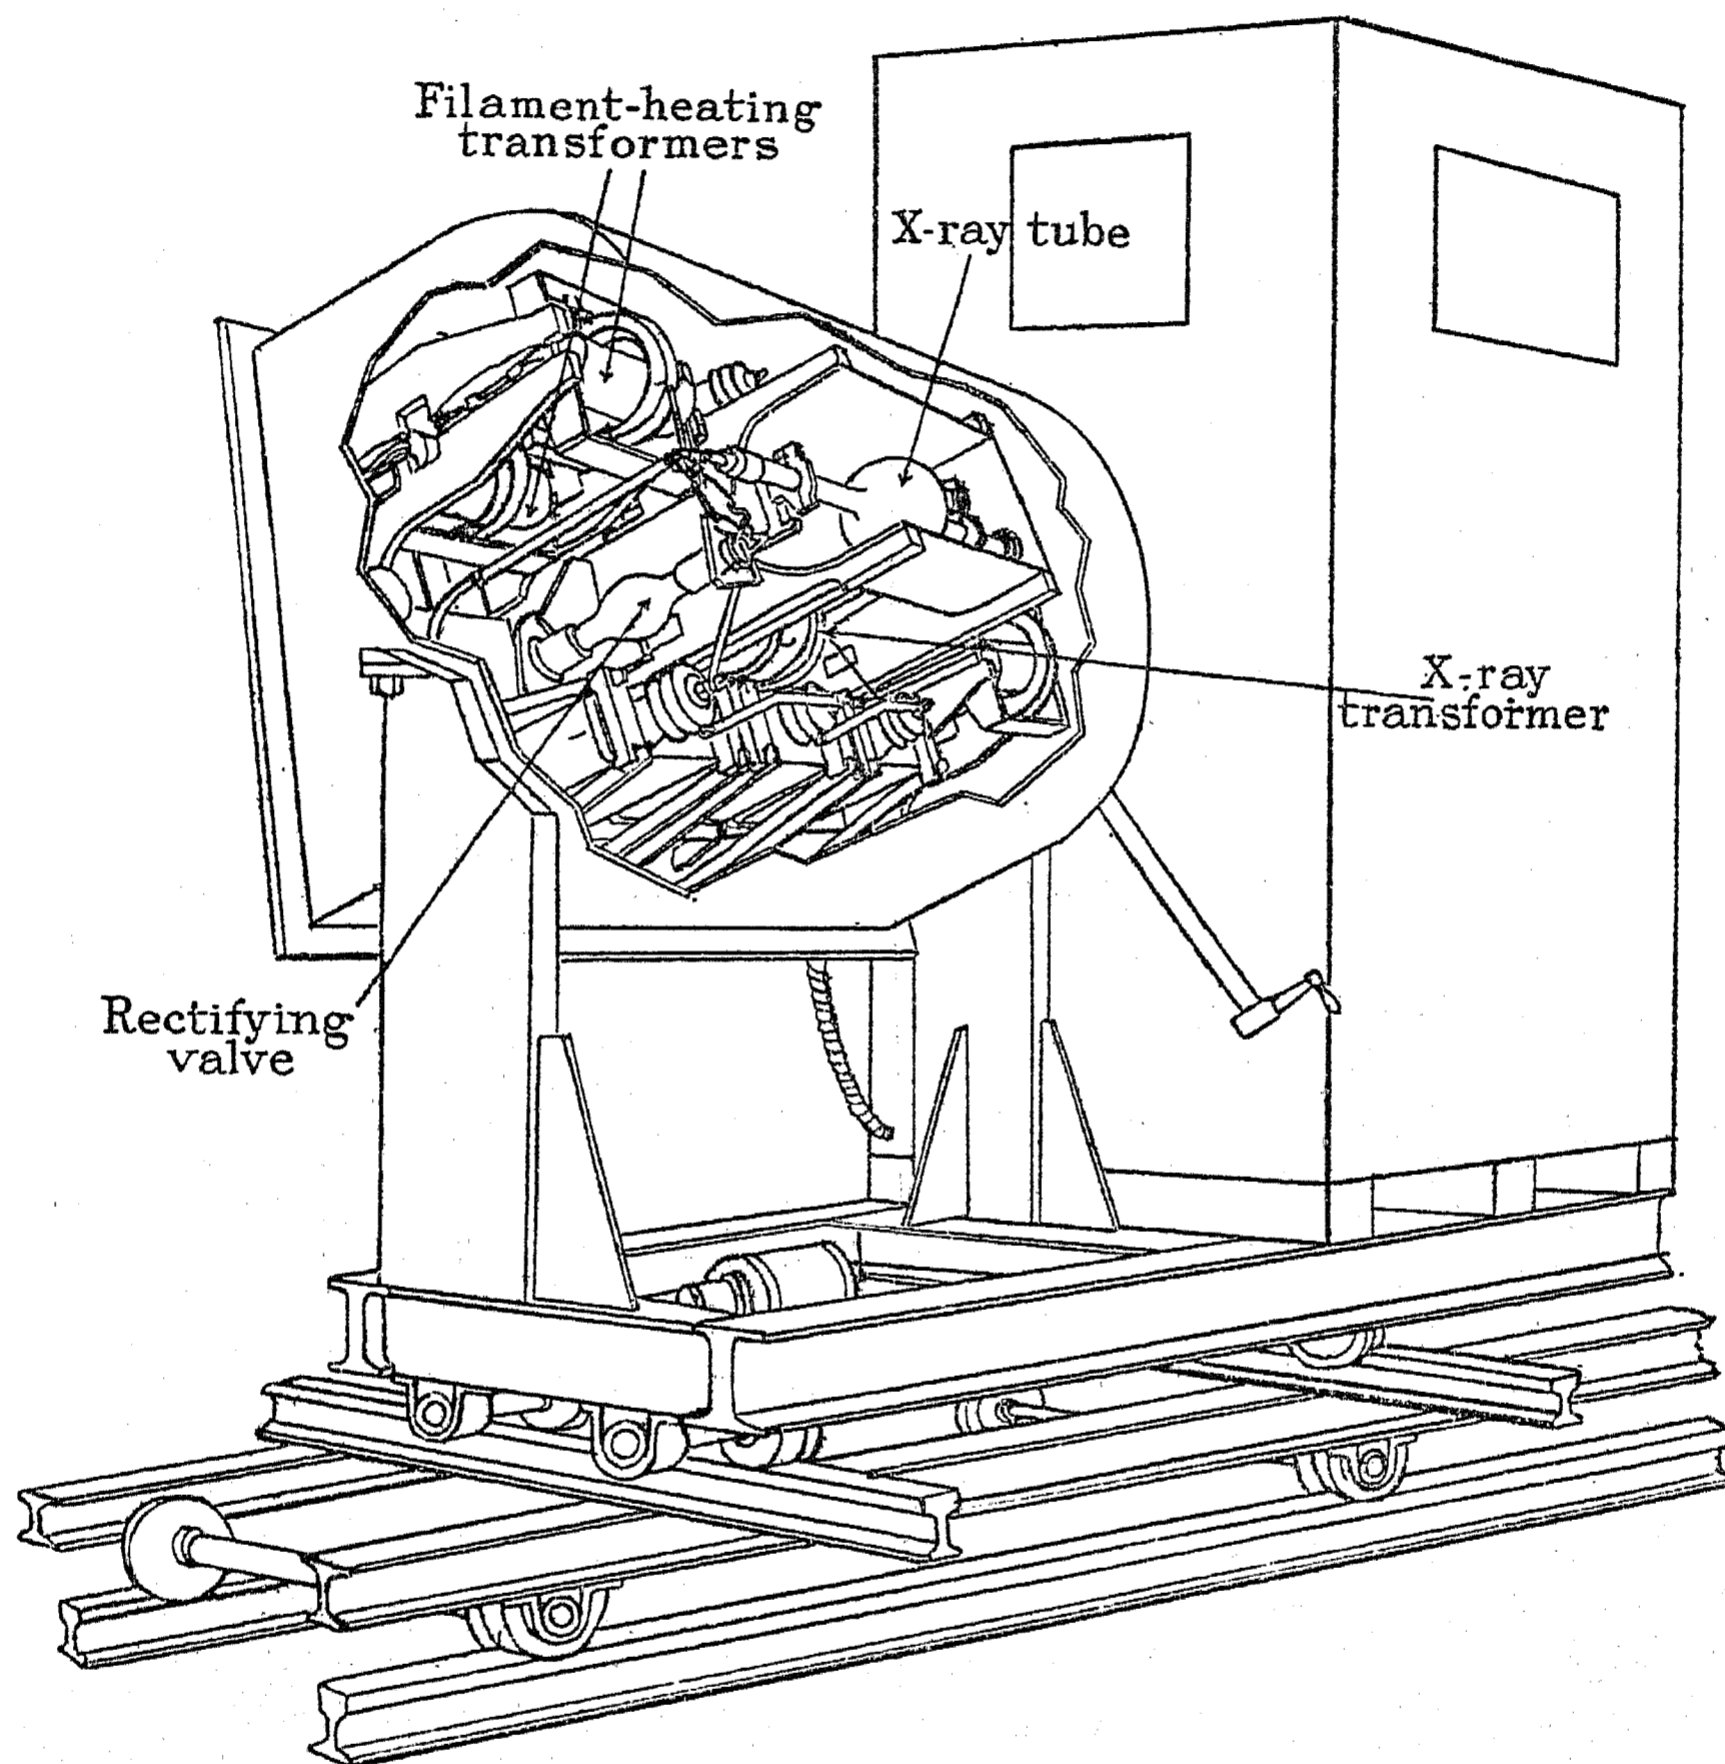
View of 300-kV(P) X-ray equipment for examination of welds, showing arrangement of earthed casing, the control cabin, and travelling gear.
